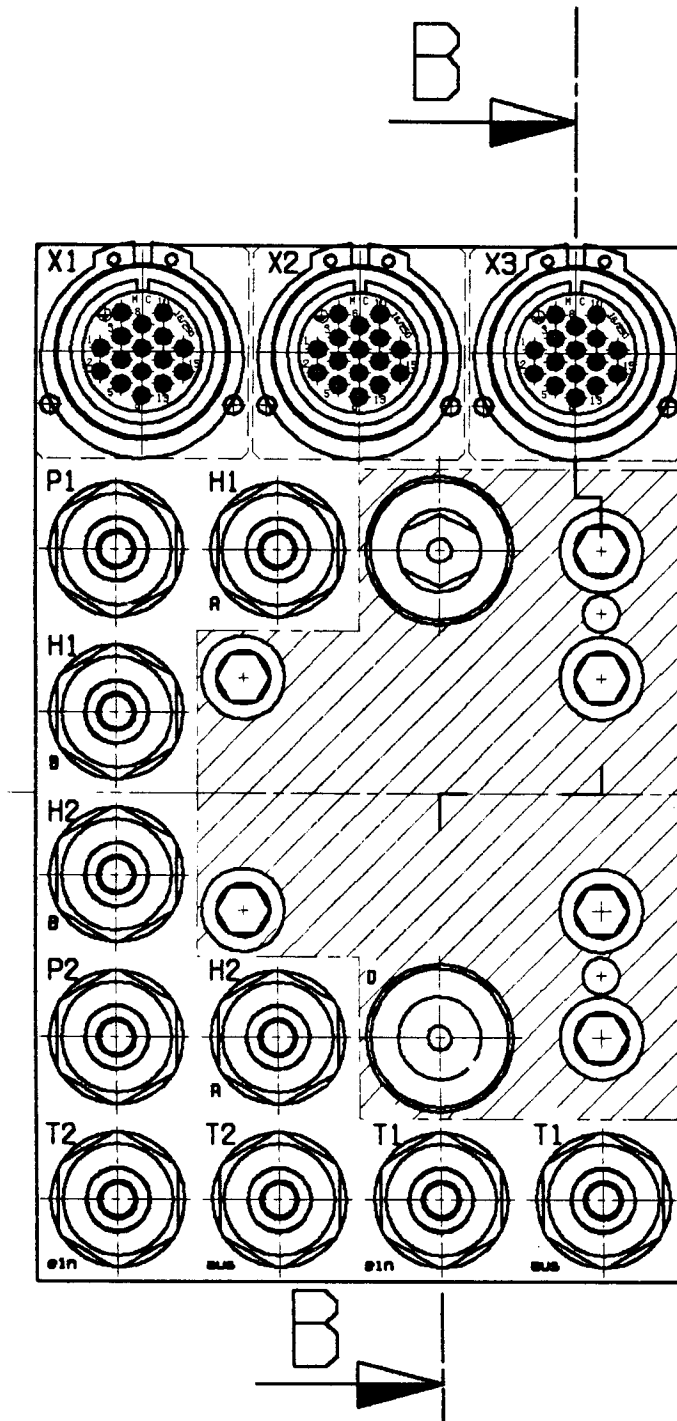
View of a fixed machine side; view of coupling side (opposite the connecting side). Position C according to Fig. 1 is shown.
